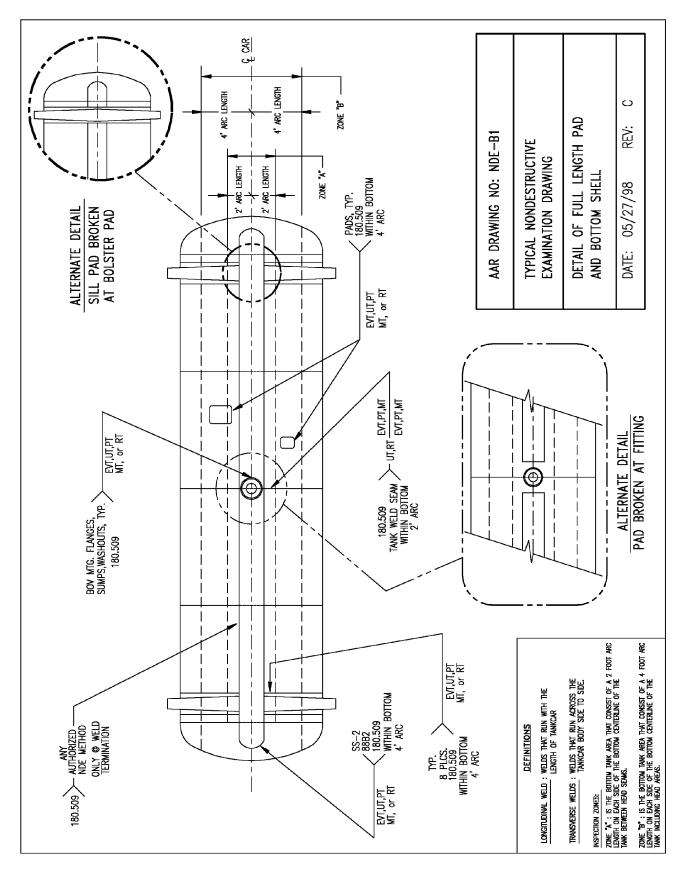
AAR Drawing No. NDE-B1 Detailing the Full Length Pad and Bottom Shell
